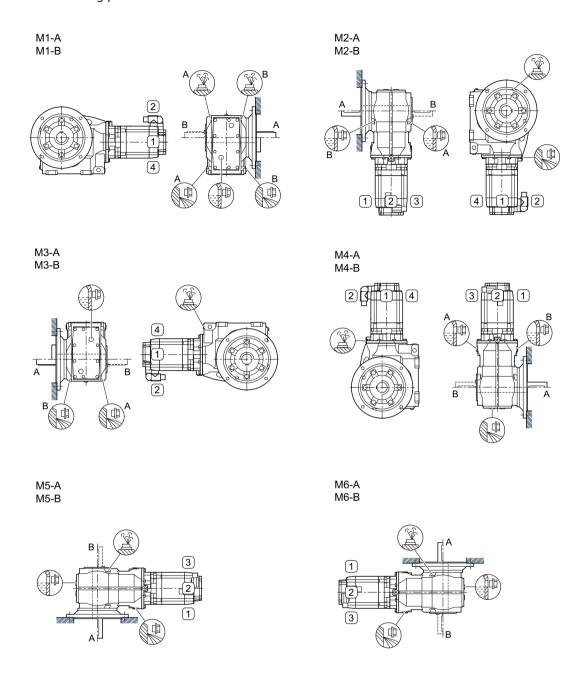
Mounting positions for servo bevel geared motor K.F (flange-mounted design) and KAZ (housing flange design), frame sizes 39 - 149, 3 stage
